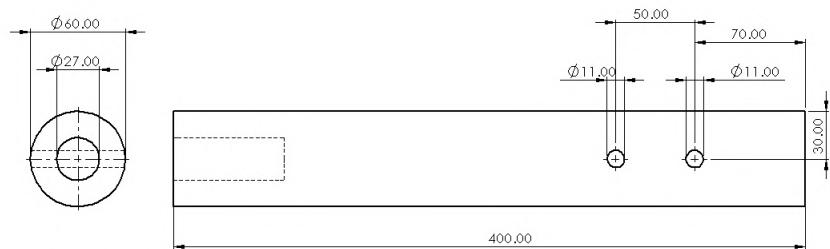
2D Drawing of the 2nd part of the leg (All dimensions are in mm)
